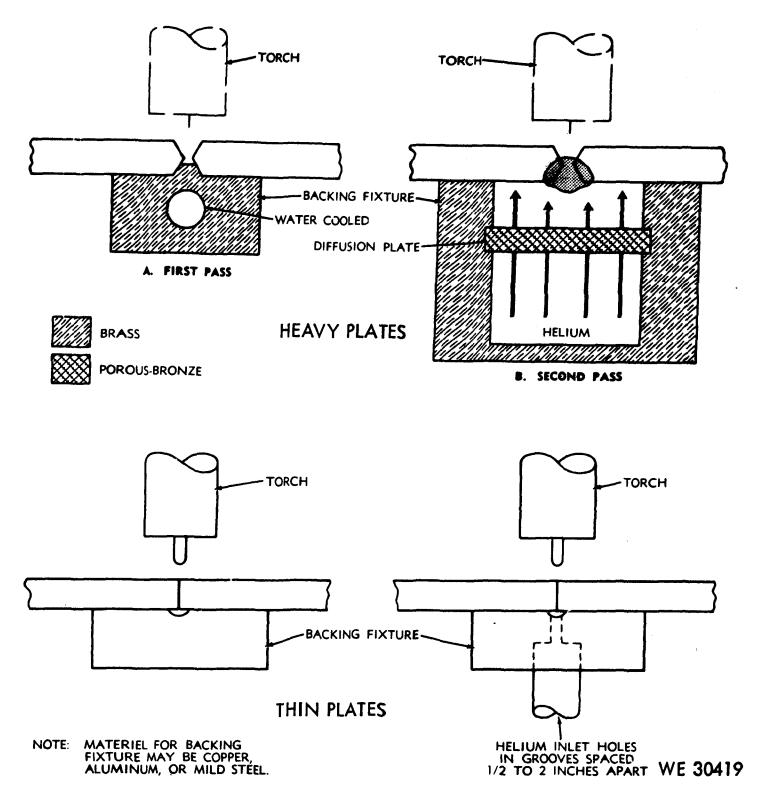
Backing fixtures for butt welding heavy plate and thin sheet.
